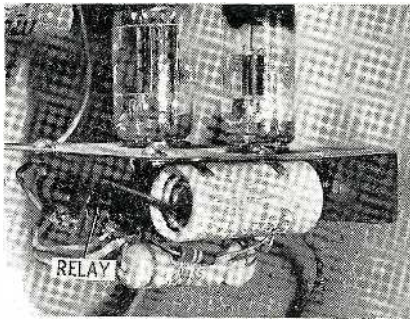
Two-tube subchassis assembly in the control panel of the "A" machine.
